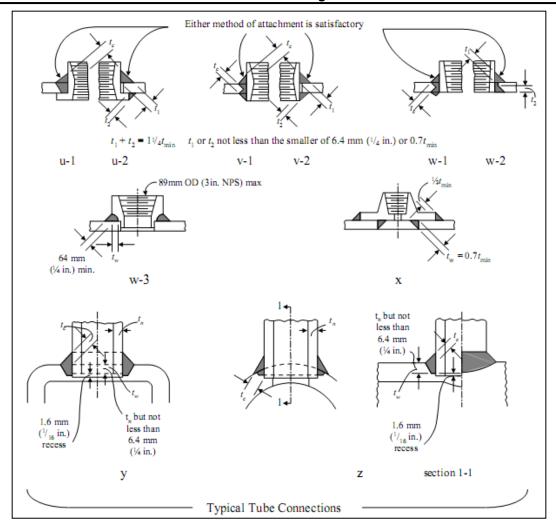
Types of fusion-welded construction details (continued)
